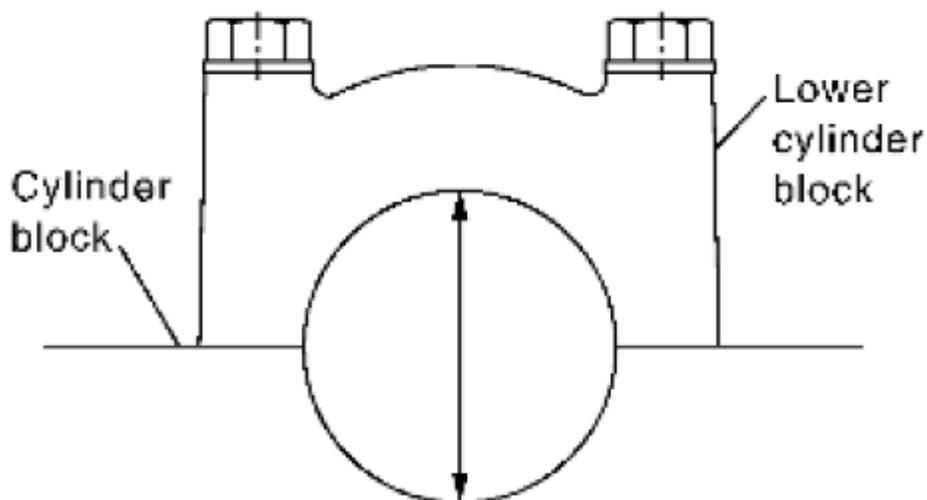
Identifying Main Bearing Housing Inner Diameter
